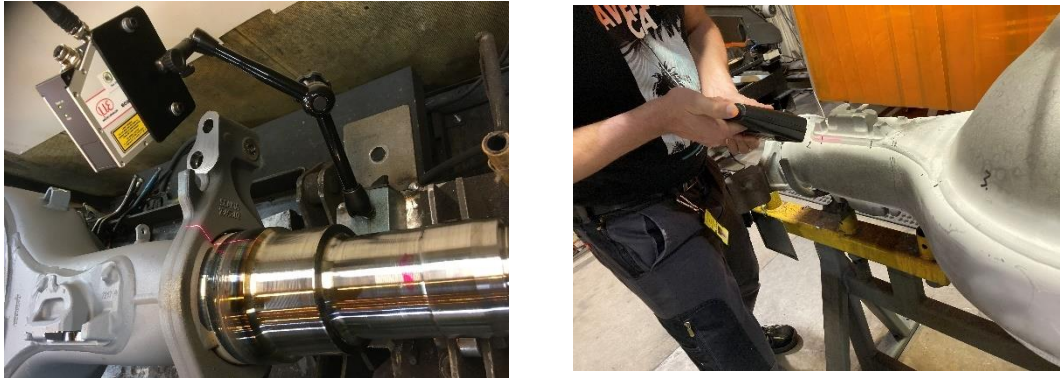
Welds scanned in rotomat fixture (left), and with handheld scanning equipment (right)
